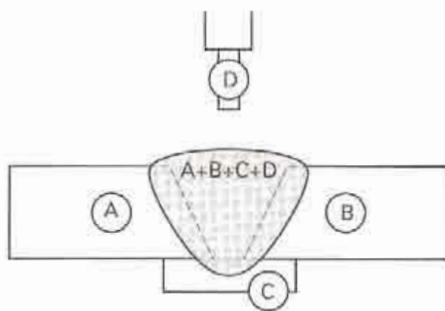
Schematic of a butt weld between a plate of metal A and a plate of metal B, with a backing plate of metal C and filler of metal D. The resulting weld nugget becomes a complex alloy of all four metals.
